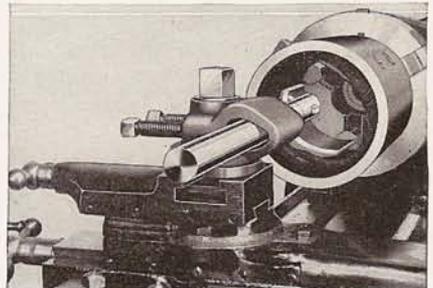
Boring the Field Poles of a Generator True to Provide Clearance for Armature.
